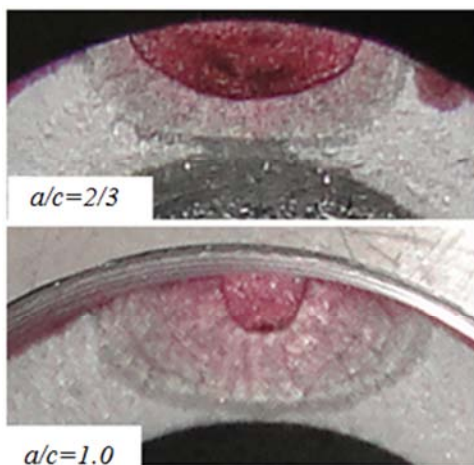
Two samples of the fatigue fractured surfaces
